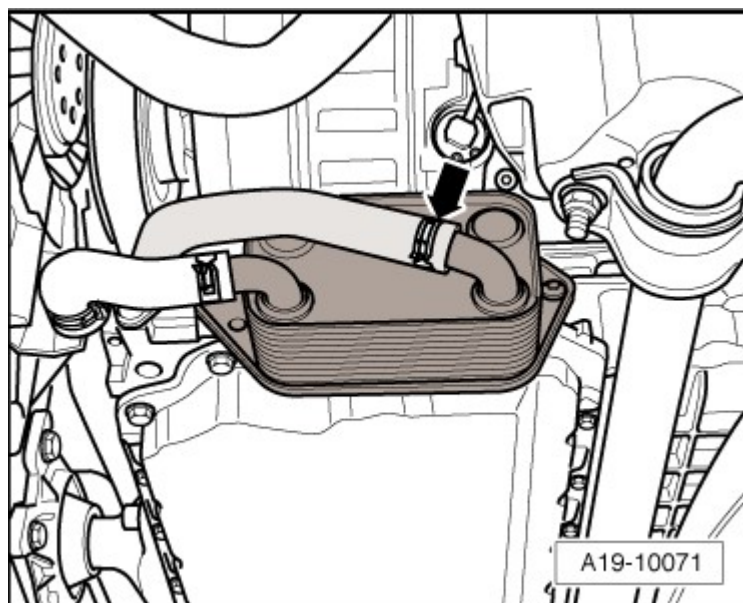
Disconnecting Coolant Hose From Oil Cooler
